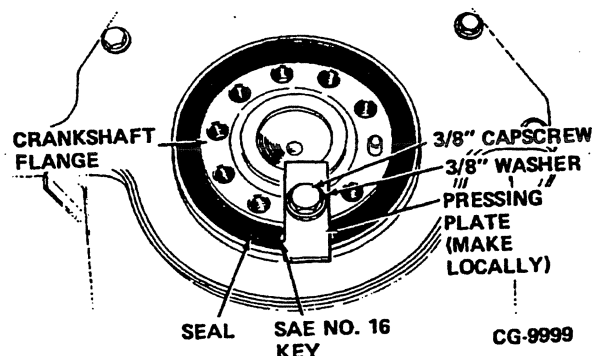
Crankshaft Rear Oil Seal Adjustment
